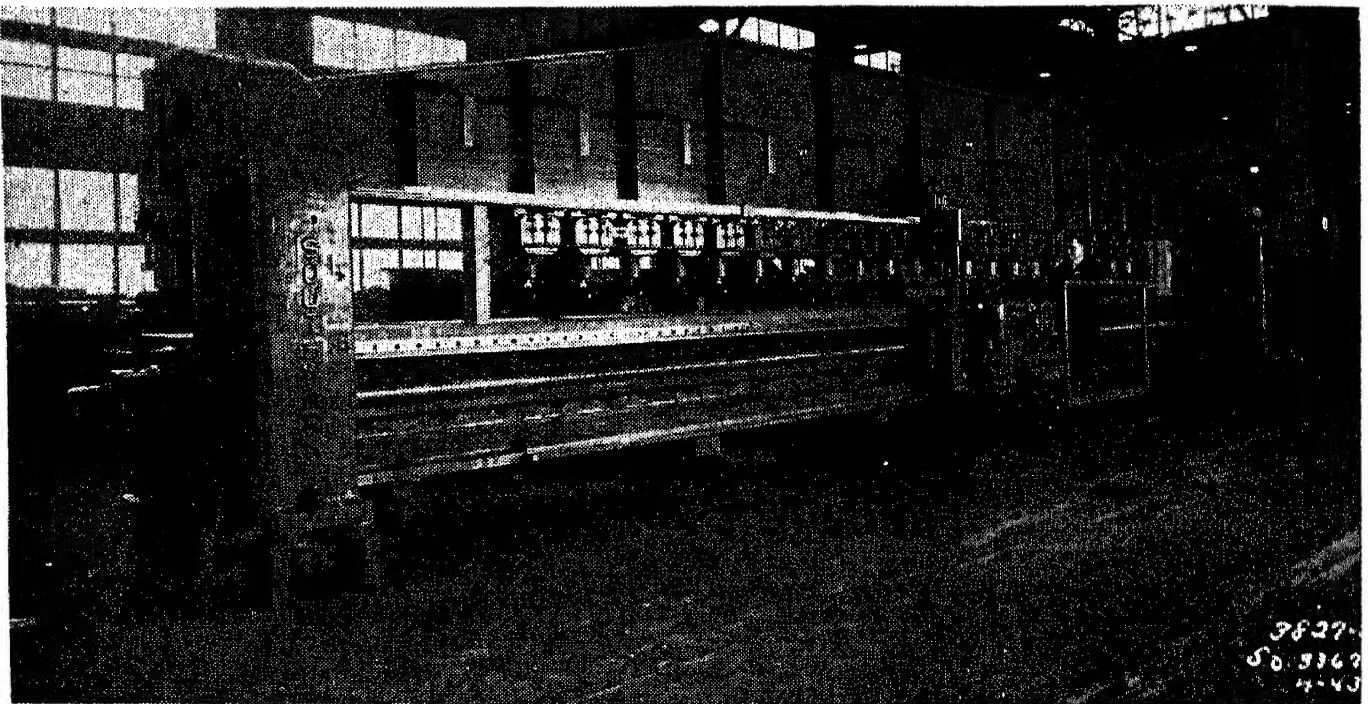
A 32 ft plate planer. (Courtesy Baldwin-Lima-Hamilton Corp.)
